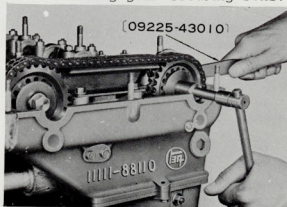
Removing Camshaft Timing Gear V1241 Securing Bolt
